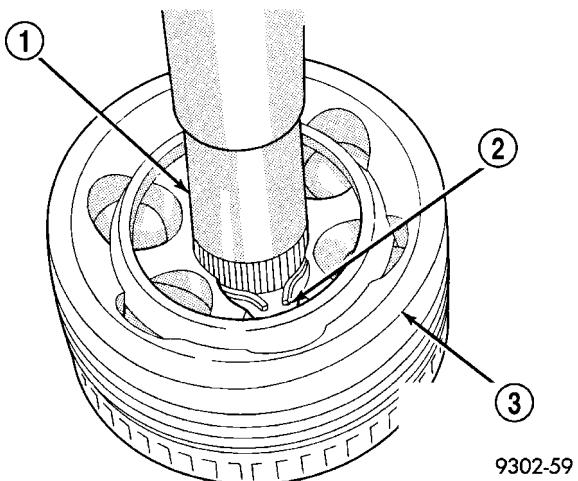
Outer C/V Joint Installed On Interconnecting Shaft
